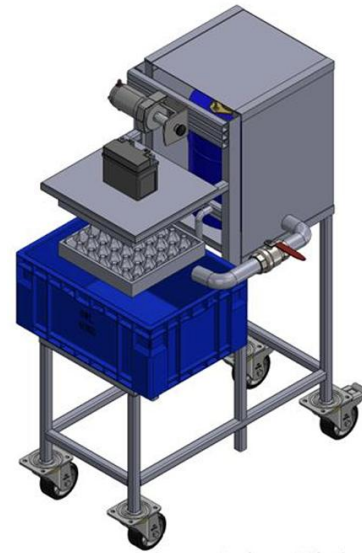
Three-dimensional design model of the Paper Egg Tray Machine prototype, featuring a compact steel frame structure, pulping tank, vacuum-assisted forming mold, electric-winch lifting mechanism, and caster wheels for mobility.
